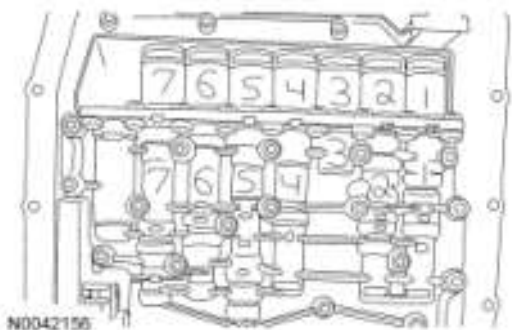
Identifying Mark On Each Solenoid And Corresponding Bore
